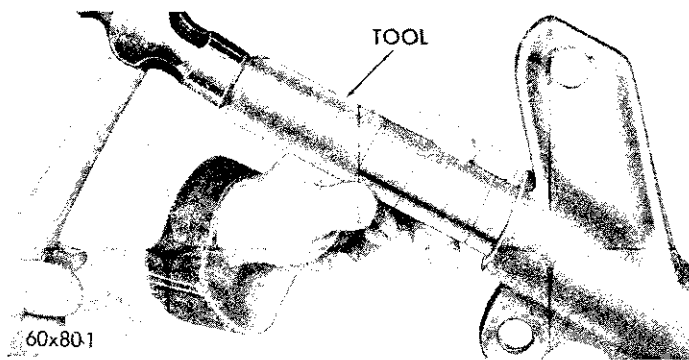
Installing Gear Shaft Housing Outer Bearing
